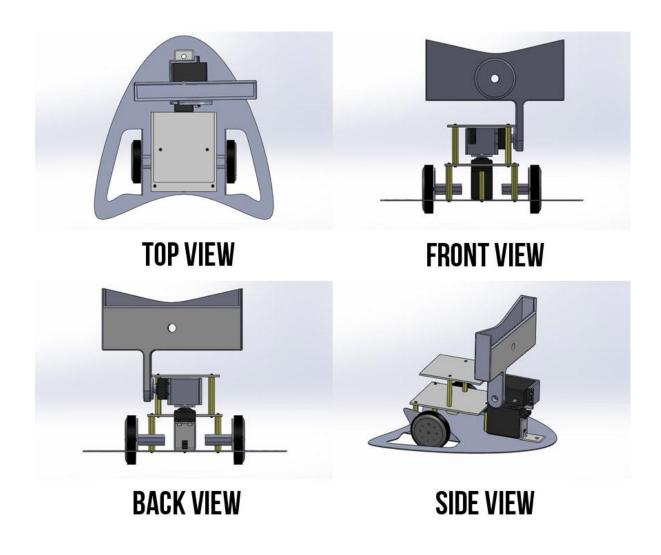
Three Dimensions Drawing of The Rescue Robot
